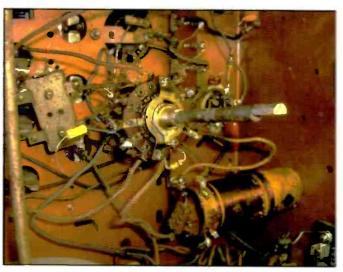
Photo F The rivet heads holding the phenotic switch wafer to the switch body are carefully drilled for removal. The large exposed coil to the right is Coil 1.
